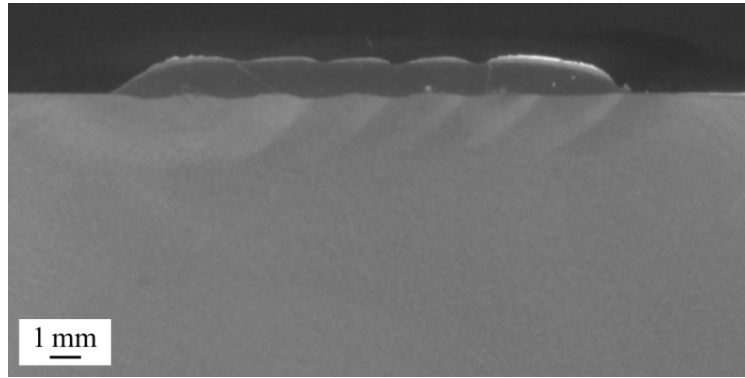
Cross-section of the deposit welded with welding parameters G
